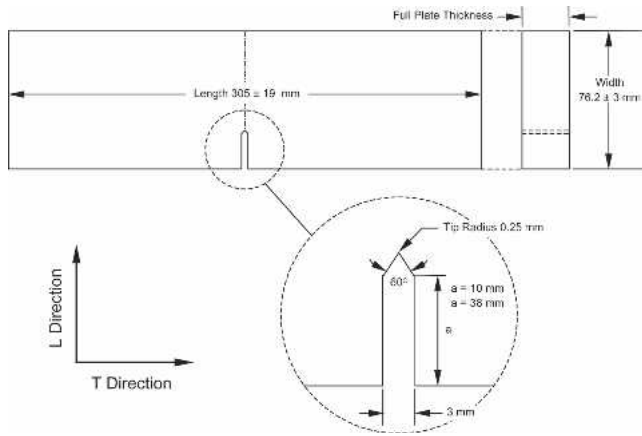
Shape and dimensions of the specimen used for the TSCT.
